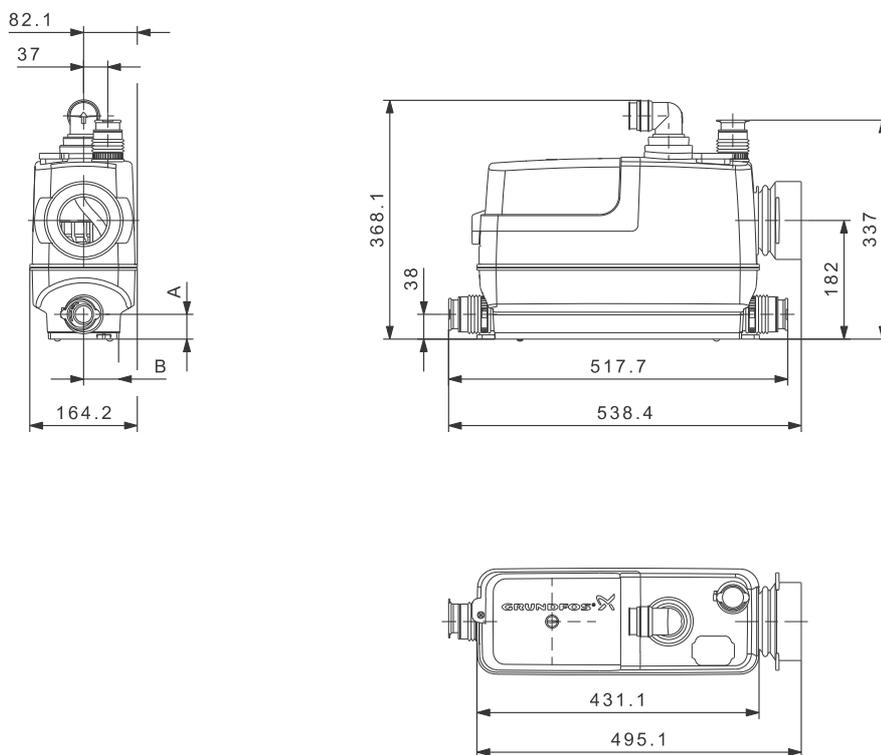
Dimensional drawings, Sololift2 CWC-3
